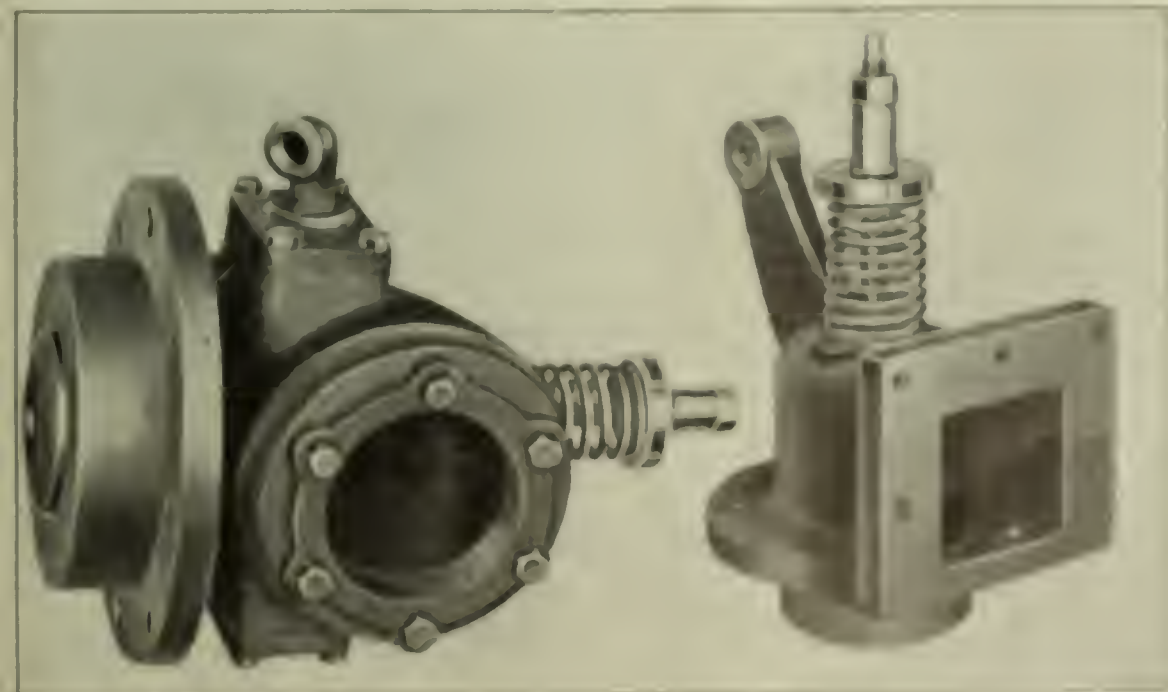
EXHAUST AND INLET VALVE CAGES AND VALVES
